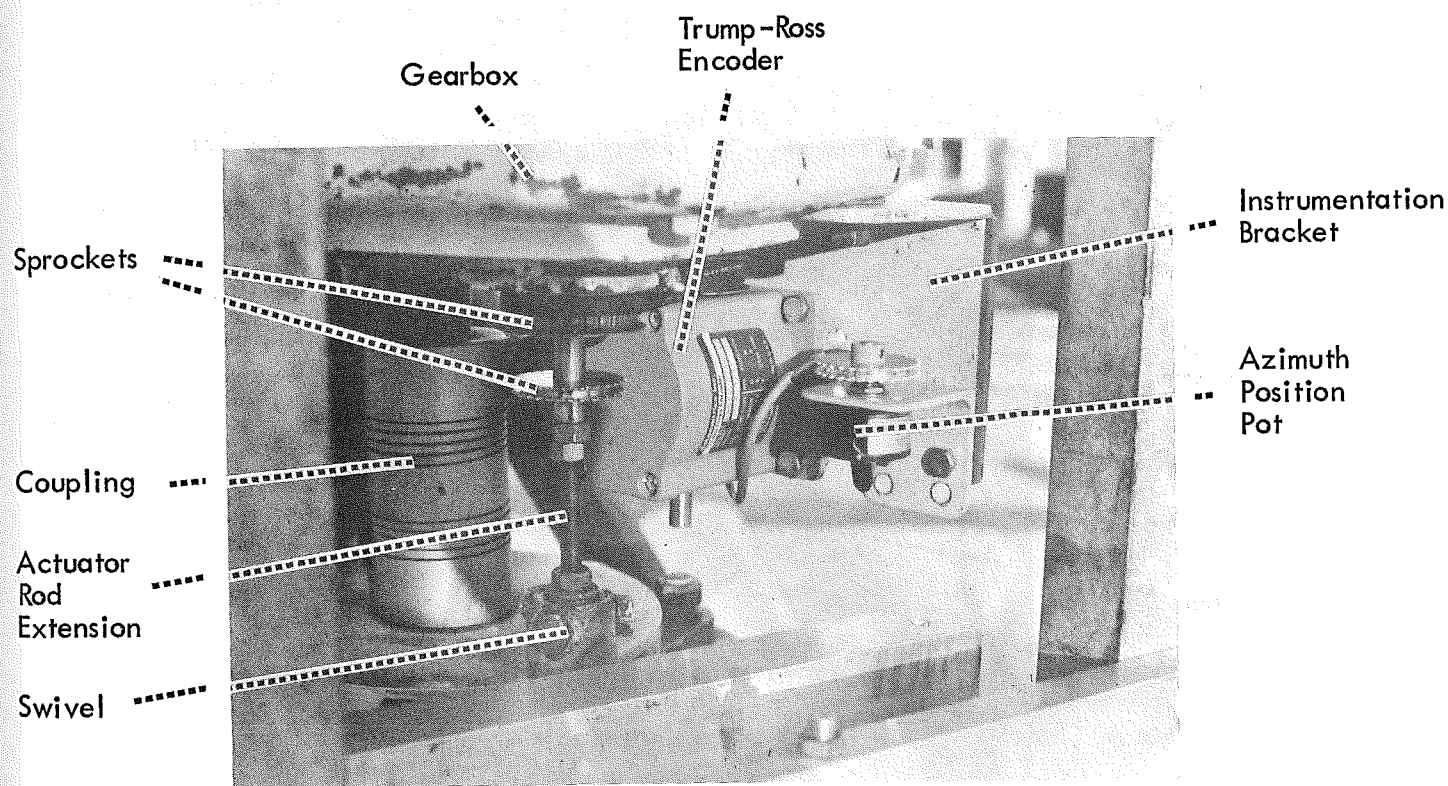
View Beneath Gearbox Showing Coupling, Actuator Rod Extension and Swivel, and Instrumentation.
